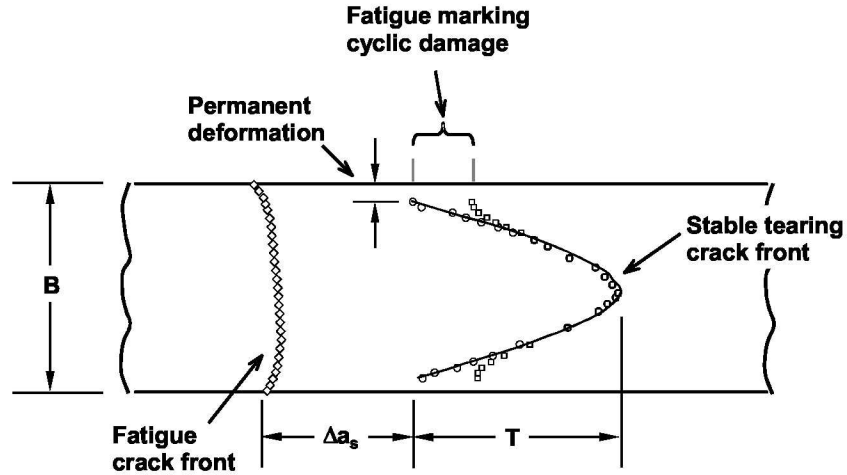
Tunneling experiments, fractured to specified crack length, then fatigue cycled to mark the crack-front shape (drawing to scale).
